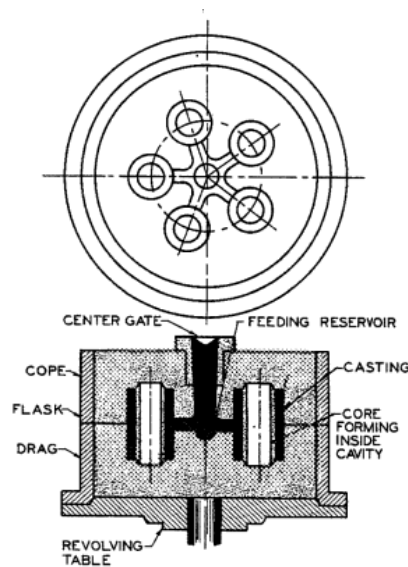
Illustration of the centrifuge technique with multiple castings placed around the central sprue [95]
